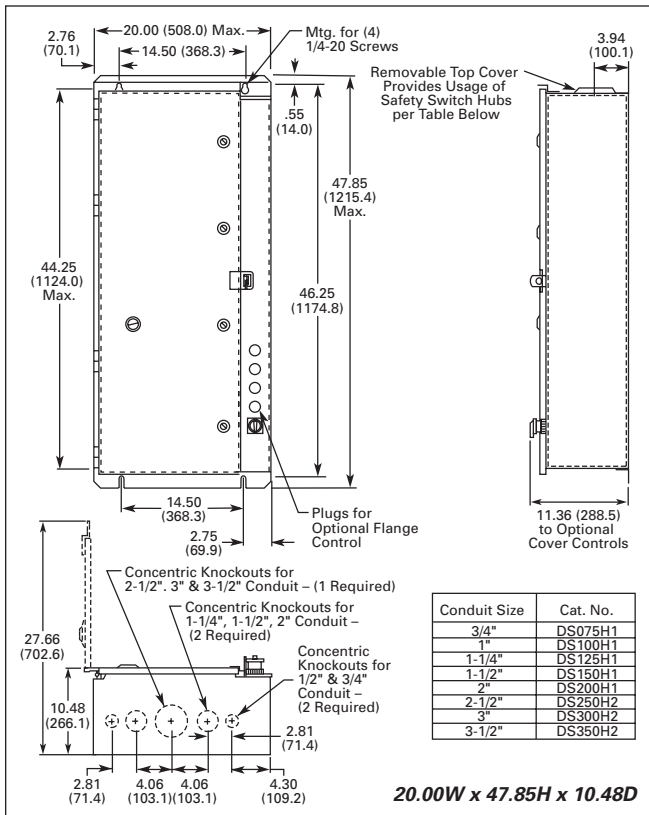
Box 10, Type 3R — Approximate Dimensions in Inches (mm)
